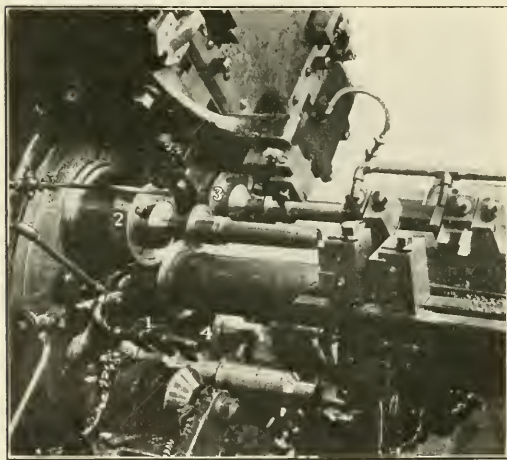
National Acme Automatic Tooling to Make Saddle Pins
